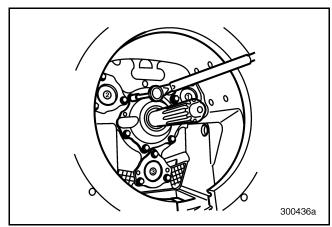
Tightening Main Drive Pinion Bearing Cover Capscrews
